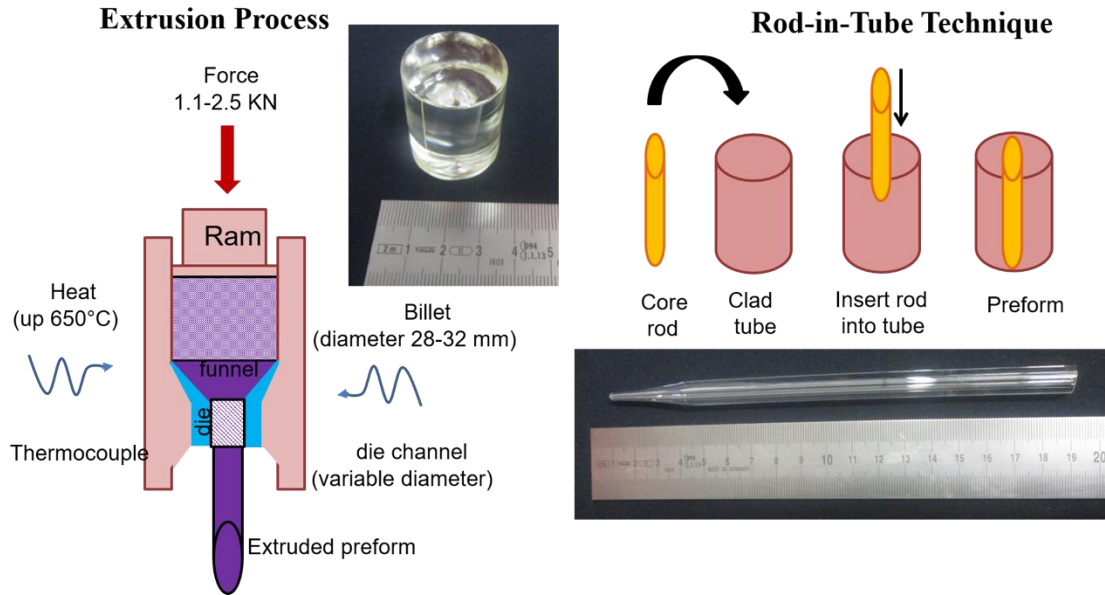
5 (a) the extrusion process to obtain clad tube (b) illustration of the Rod-in-Tube technique for fiber drawing.
